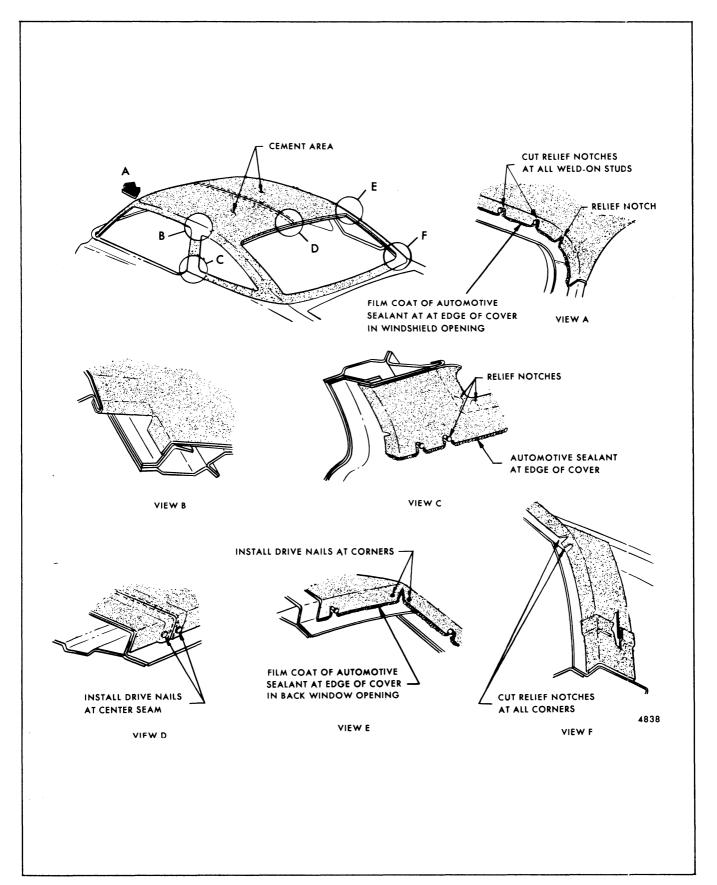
Typical Fabric Roof Cover Installation - "A" Styles
